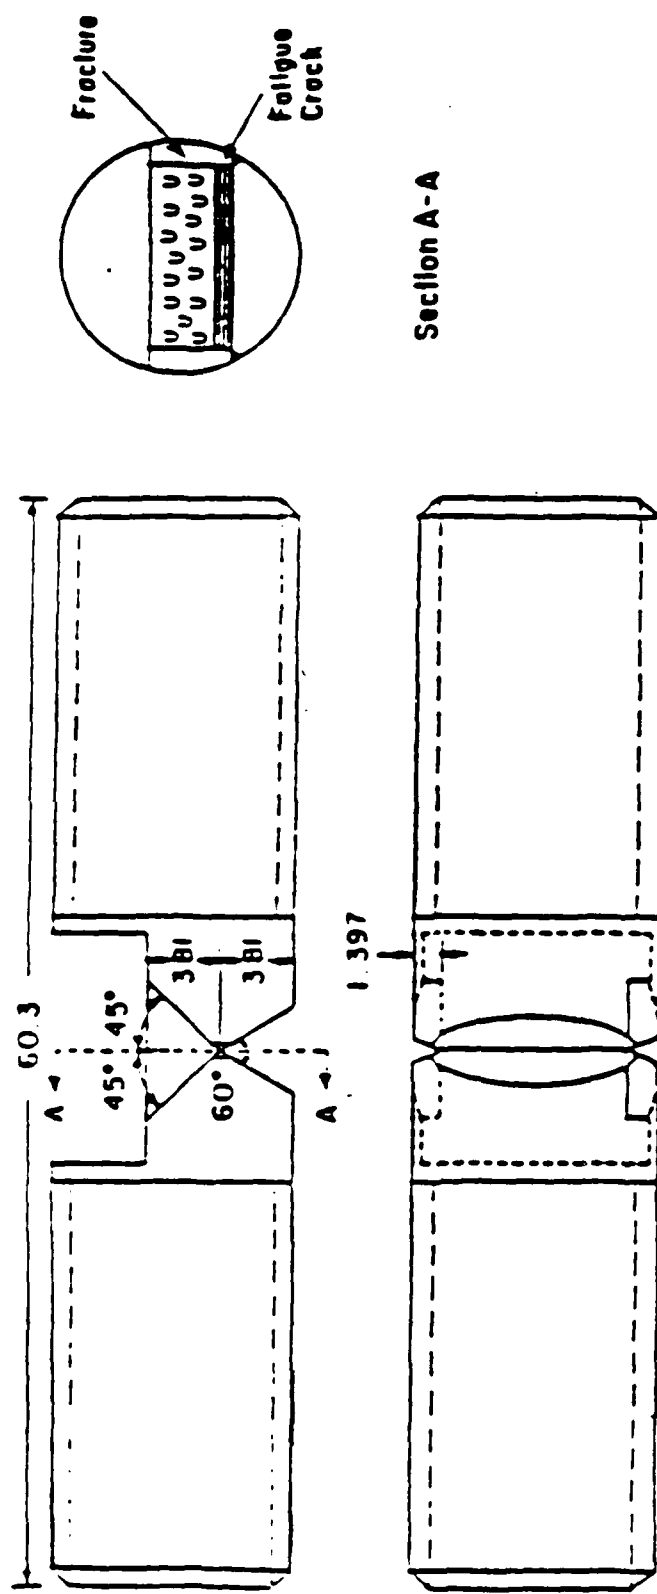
Second machining (after fatigue precracking) for the symmetric specimens
